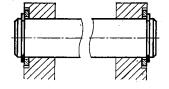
Pivot pin fixed against axial displacement by retaining rings
